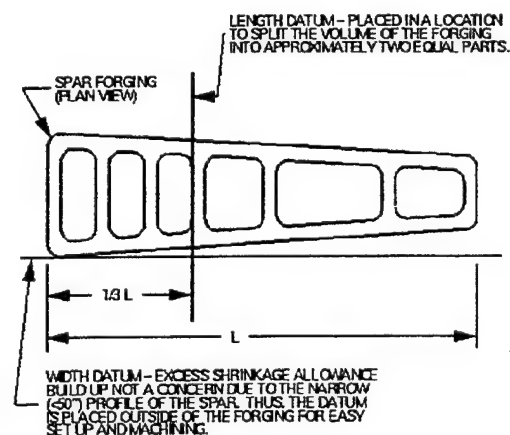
Typical Placement of Length and Width Datum Planes for a Spar Forging
